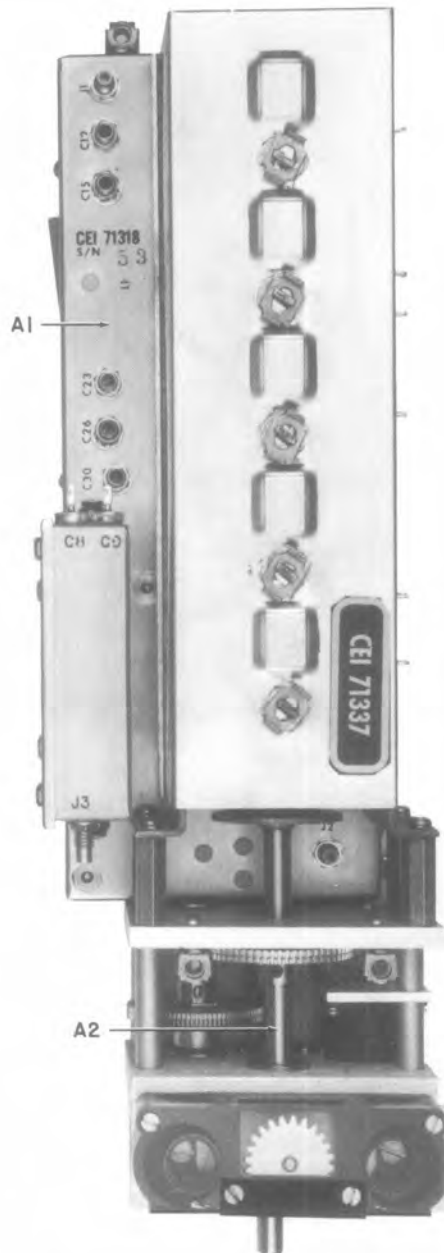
Type 71337 Tuning Assembly, Component Locations
